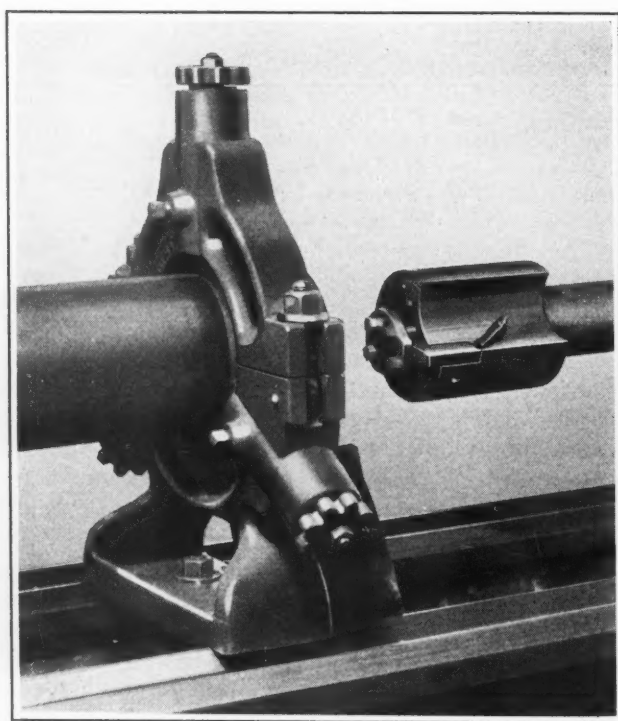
Design of the Cutter-head Employed for Boring Seamless Steel Tubing
